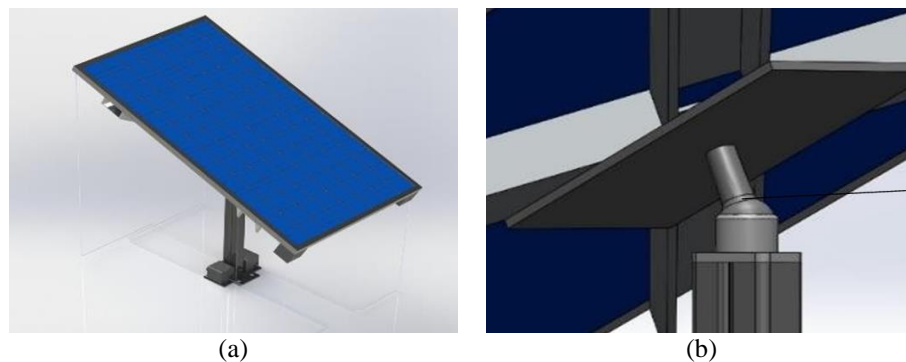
The design of the flexible-axis solar panel mechanism shown from (a) an isometric view and (b) a rear view
